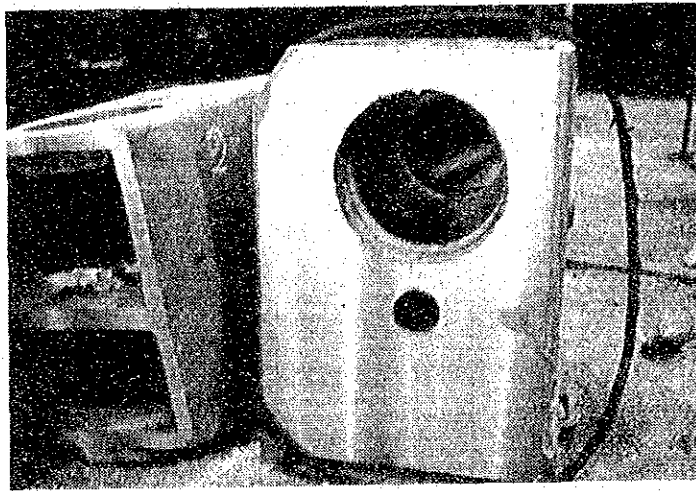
Defect “blow hole” appeared after machined
